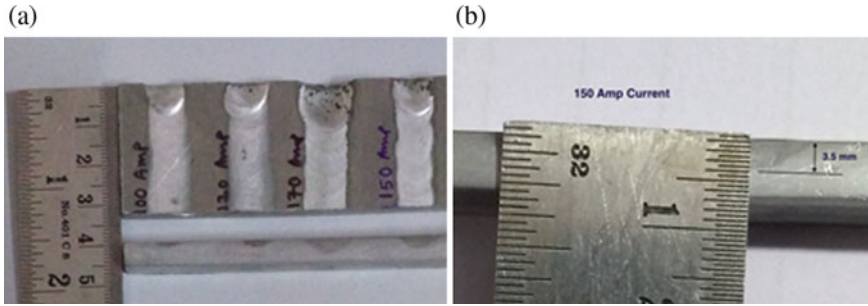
Bead-on-plate trials to reveal welding penetration: a weld penetration at different current levels, b Weld penetration for 150 amp current
